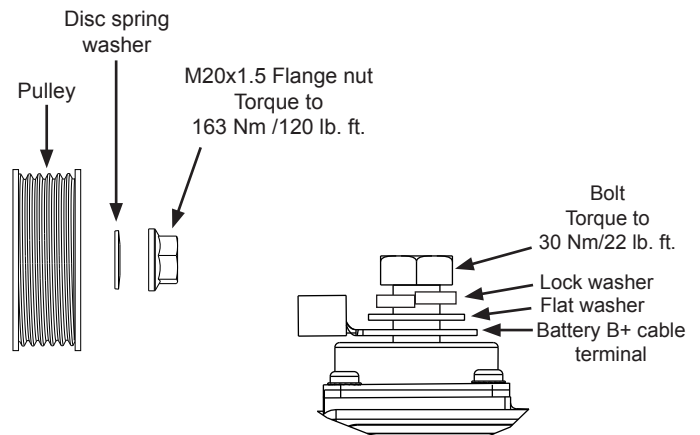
Alternator B+ Terminal Hardware Stacking Order
